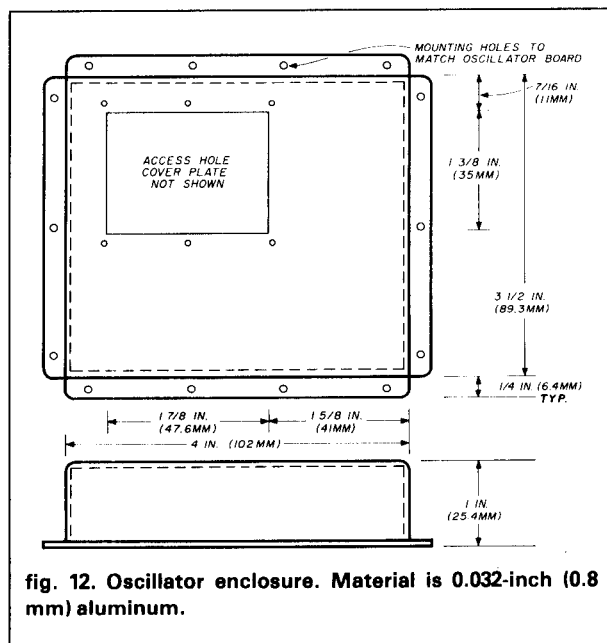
Oscillator enclosure. Material is 0.032-inch (0.8 mm) aluminum.
